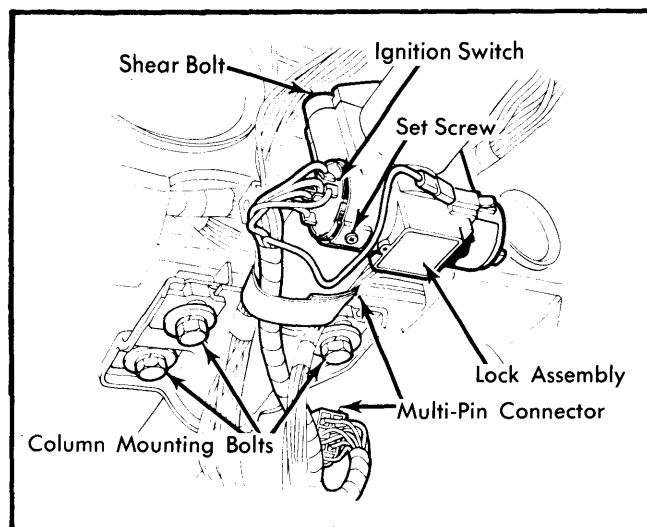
Bottom View of Steering Column Showing Ignition Switch and Column Lock — MGB Shown
